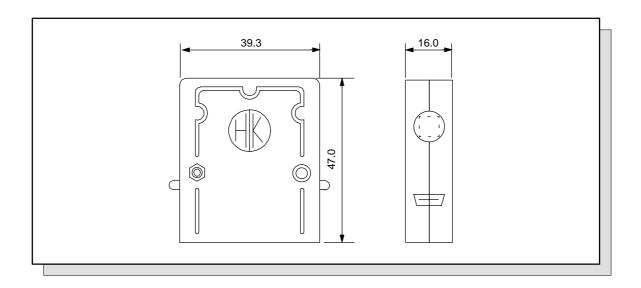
EXTERNAL DIMENSIONS OF EXTERNAL CNC BATTERY UNIT
